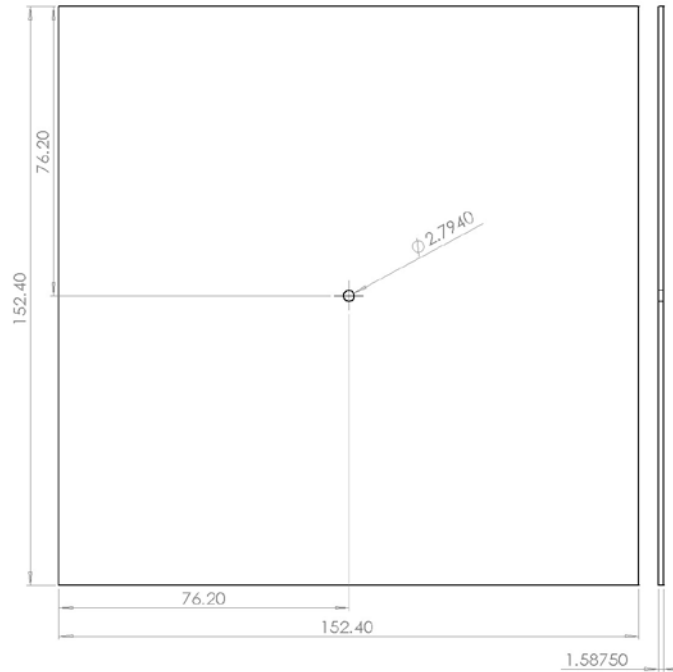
Schematic of 3D-printed plate with dimensions included (in millimeters).
